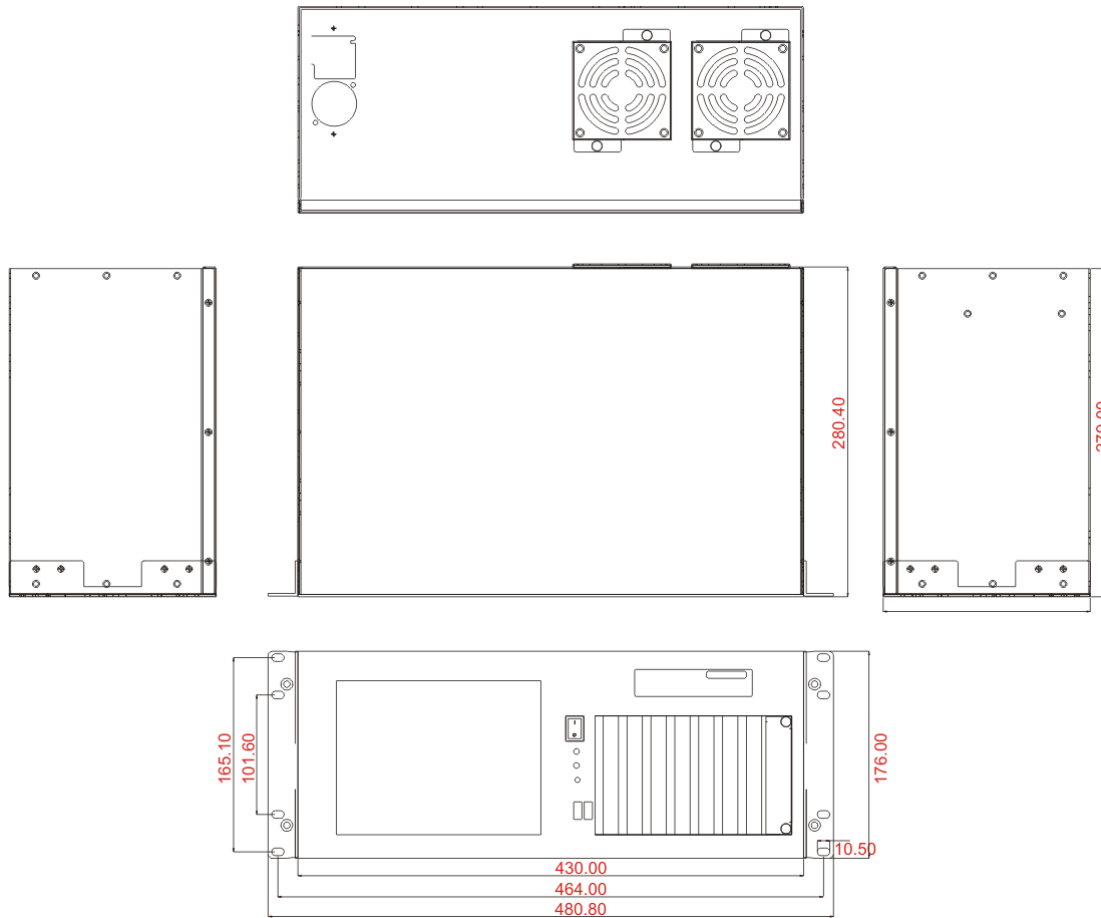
RPC-6108 Physical Dimensions (millimeters)
